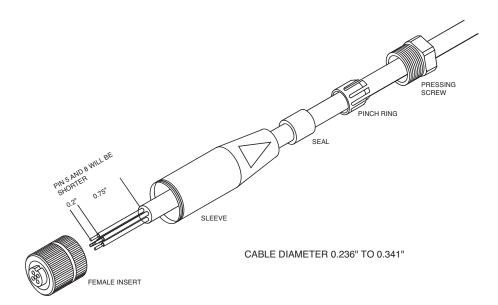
Assembly Of M12.5 And M12.8 Connectors
